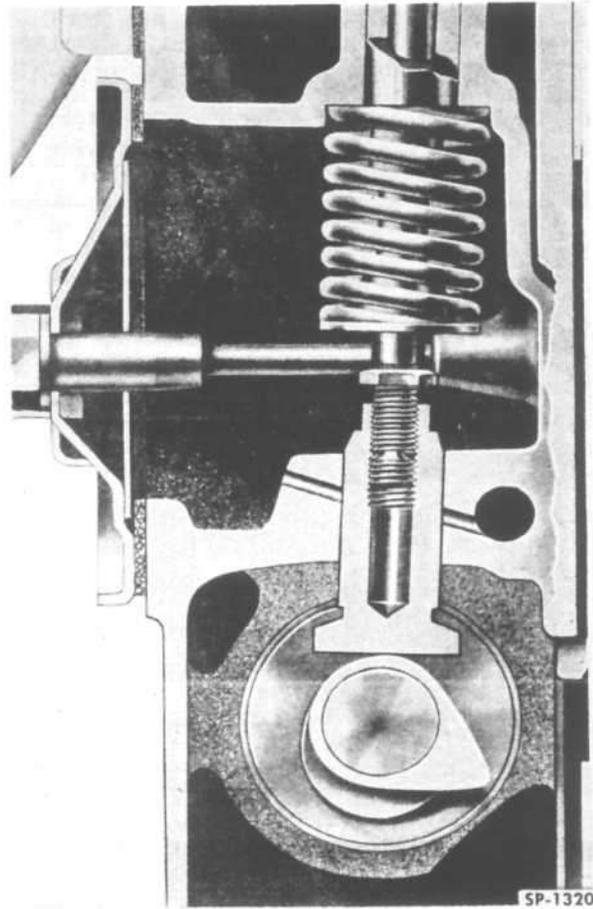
CAMSHAFT, TAPPET AND VALVE
